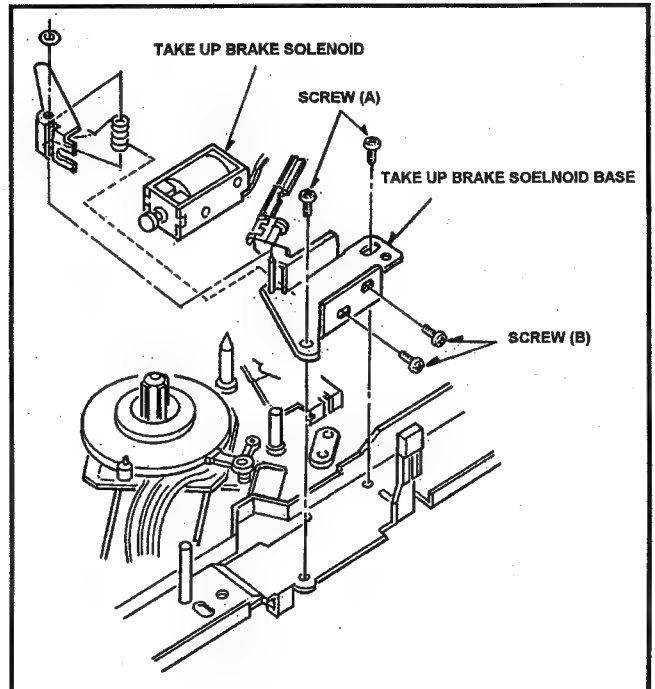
Removal of Take Up Brake Solenoid
